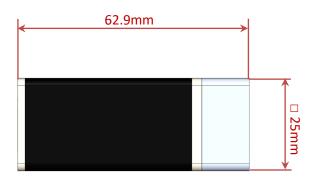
CUBE527 OUTER DIMENSIONS (TOP VIEW)
